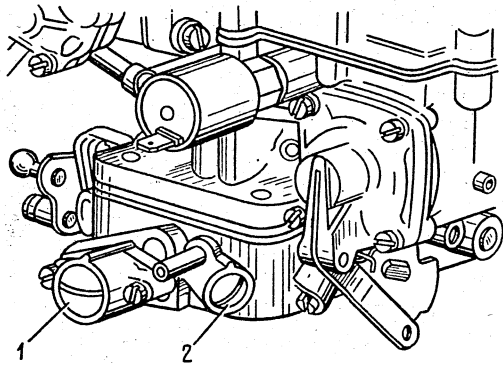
Idling System Adjusting Screws in Carburetors 2107-1107010-10 and 2107-1107010-20:
